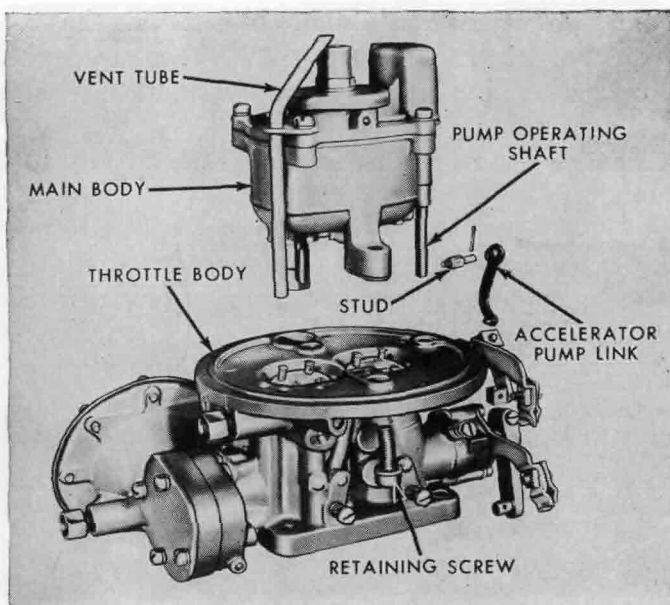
Type of carburetor on which air cleaner is mounted to surround main body, with main body and throttle body separated. (Ford Motor Company)
